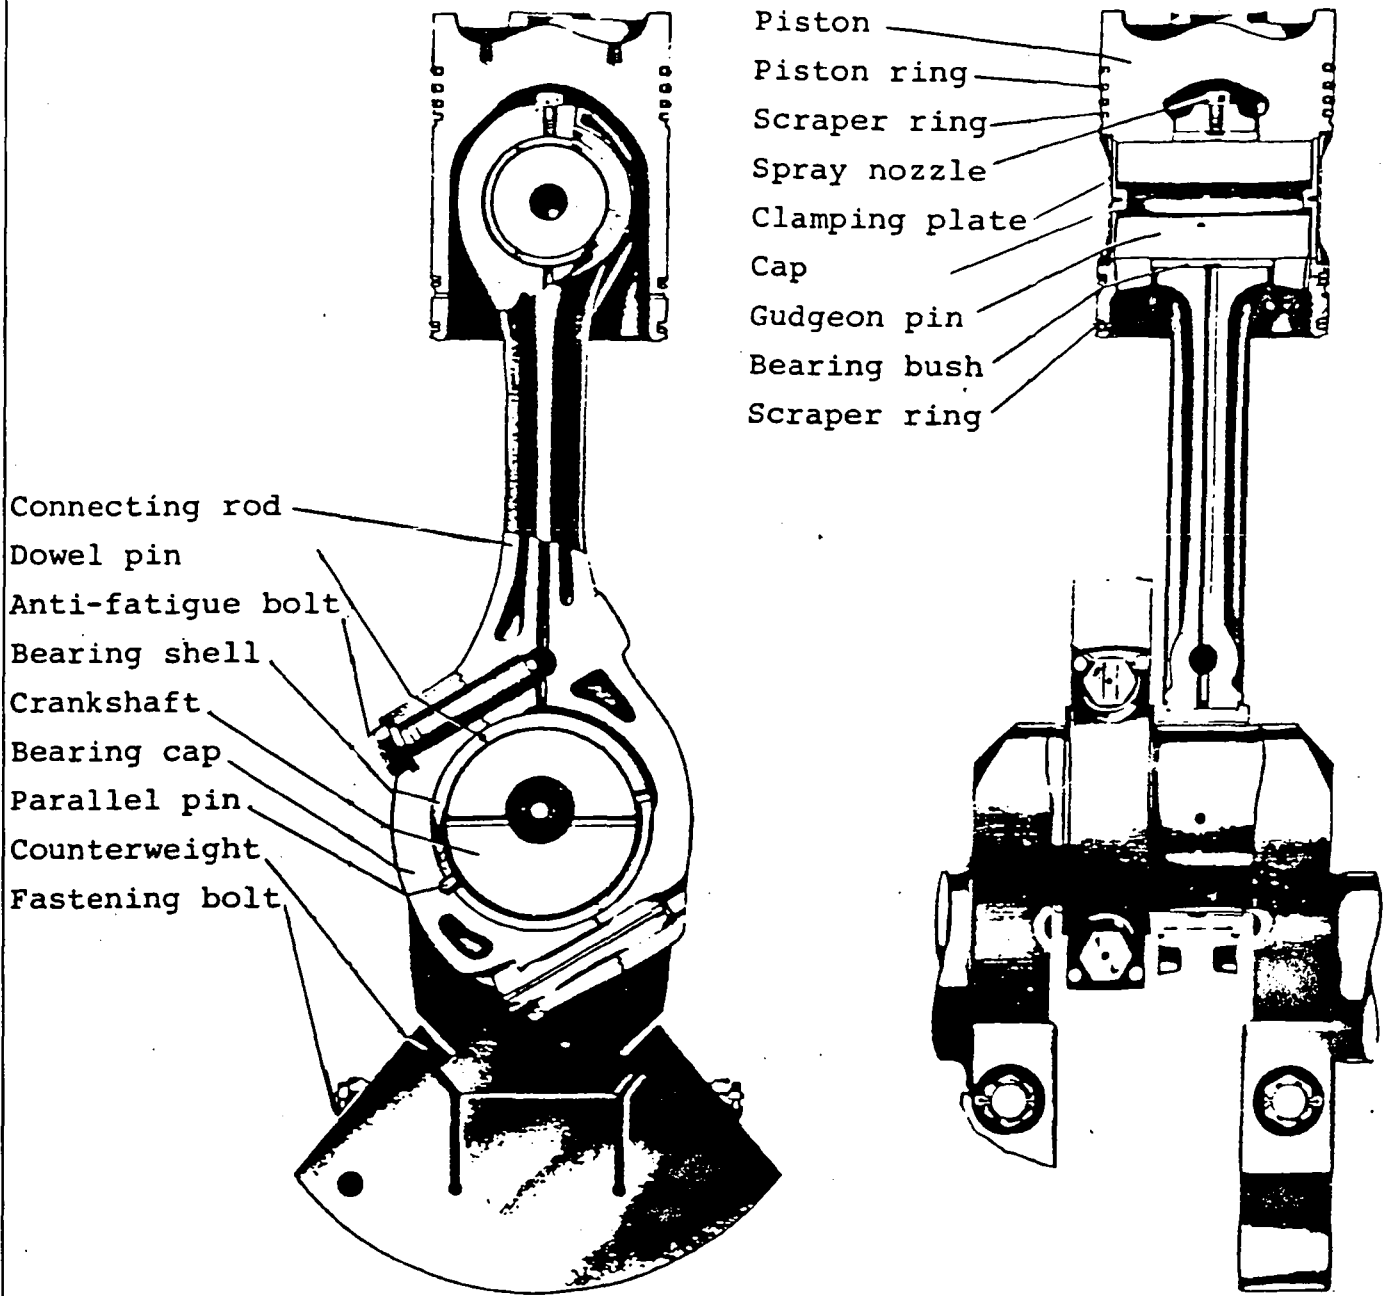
The engine components piston/connecting rod/crankshaft showing individual parts in a simple design.
